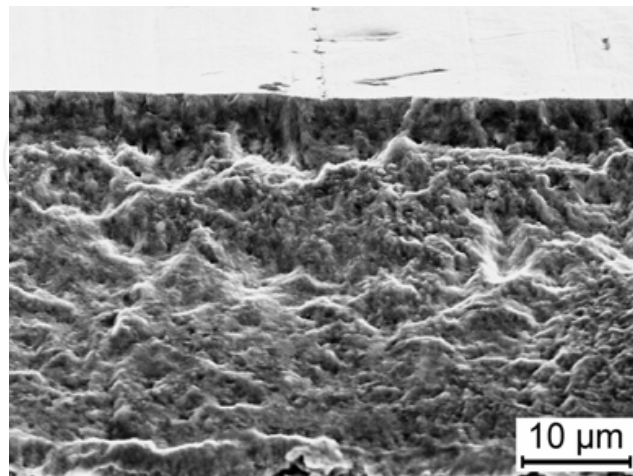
SEM-SE fractograph of the original fracture surface of a subsequently opened raceway crack on the inner ring of the spherical roller bearing of Figures 54 to 58
